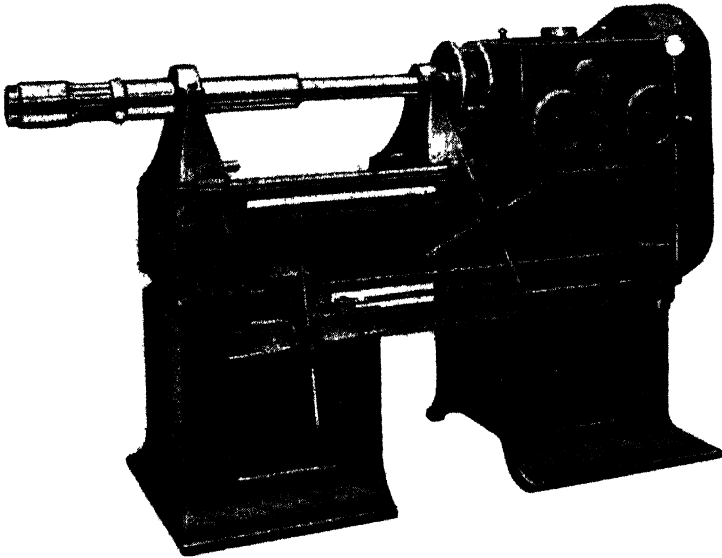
THE OLSEN HORIZONTAL BALANCING MACHINE FOR SUPERCHARGER IMPELLERS, FANS, PROPELLERS, ETC.
